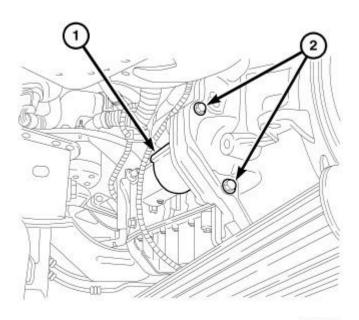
Crankshaft Position Sensor Courtesy of CHRYSLER LLC
